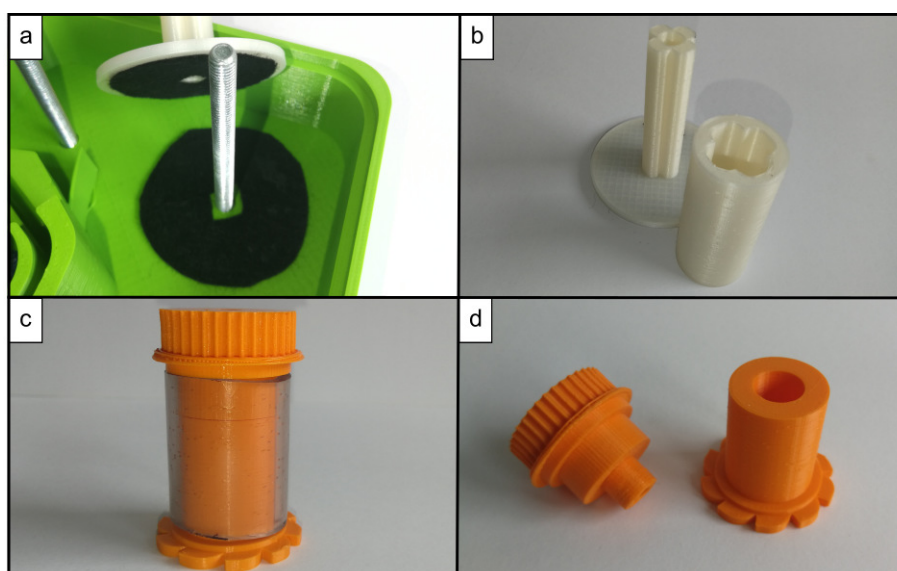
3D-printed parts of the final prototype of the developed dosing device. Stock roll and corresponding place of the lower part of the device with attached felt pieces to increase friction (a). Both parts of the stock roll allowing reuse of the device by refilling it with a new ODF coiled up on the exchangeable part of the stock roll (b). Dosing roll assembled with the plastic tube (c) and the two printed parts of the dosing roll (d).
